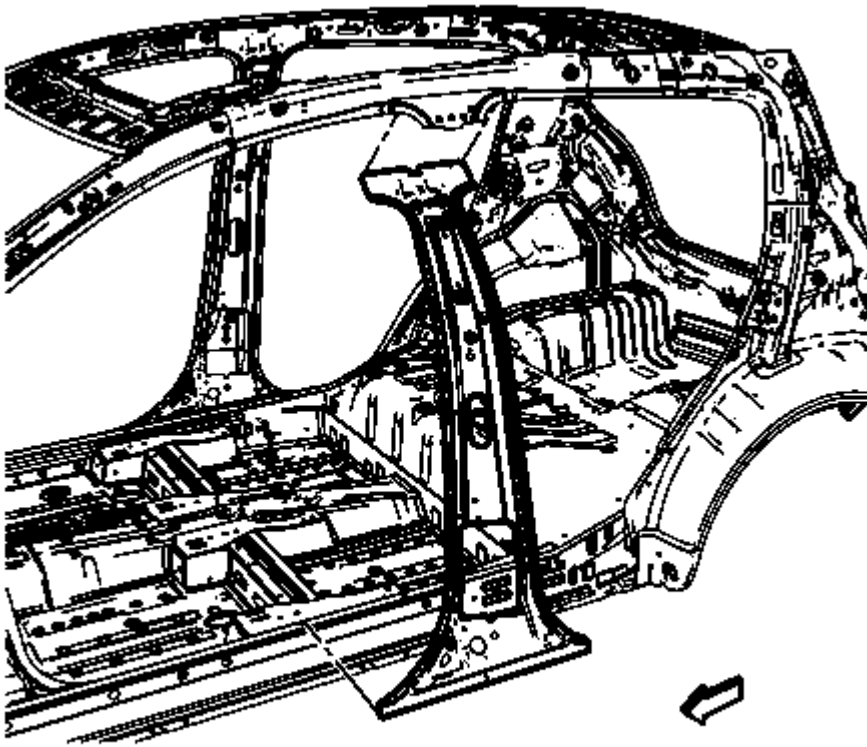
Removing Damaged Body Lock Pillar Inner Panel
